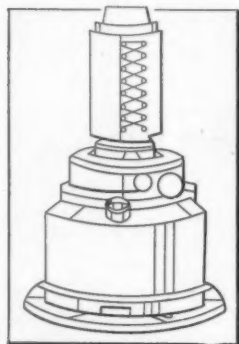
Multiple-disc clutch, with centrally located engaging spring
